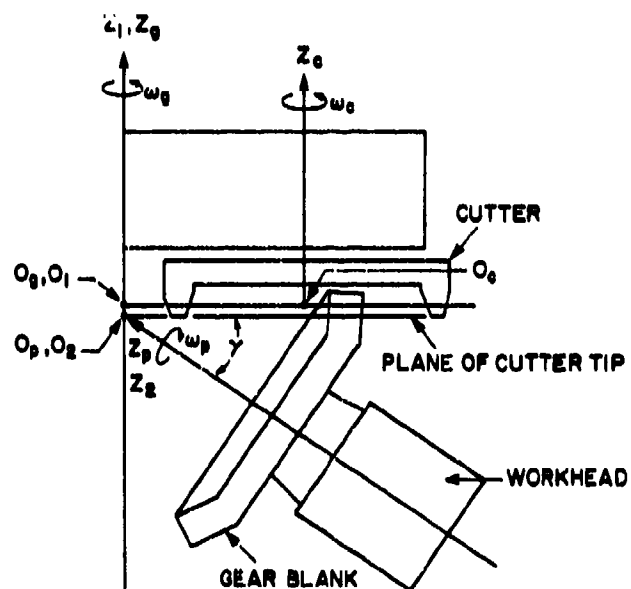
Machine Setting for Spiral Bevel Gear Manufacturing
